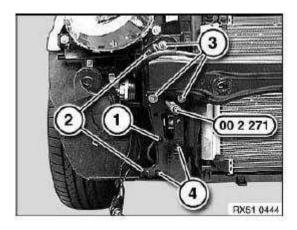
Identifying Cable Holder, Screws And Nuts Courtesy of BMW OF NORTH AMERICA, INC.
